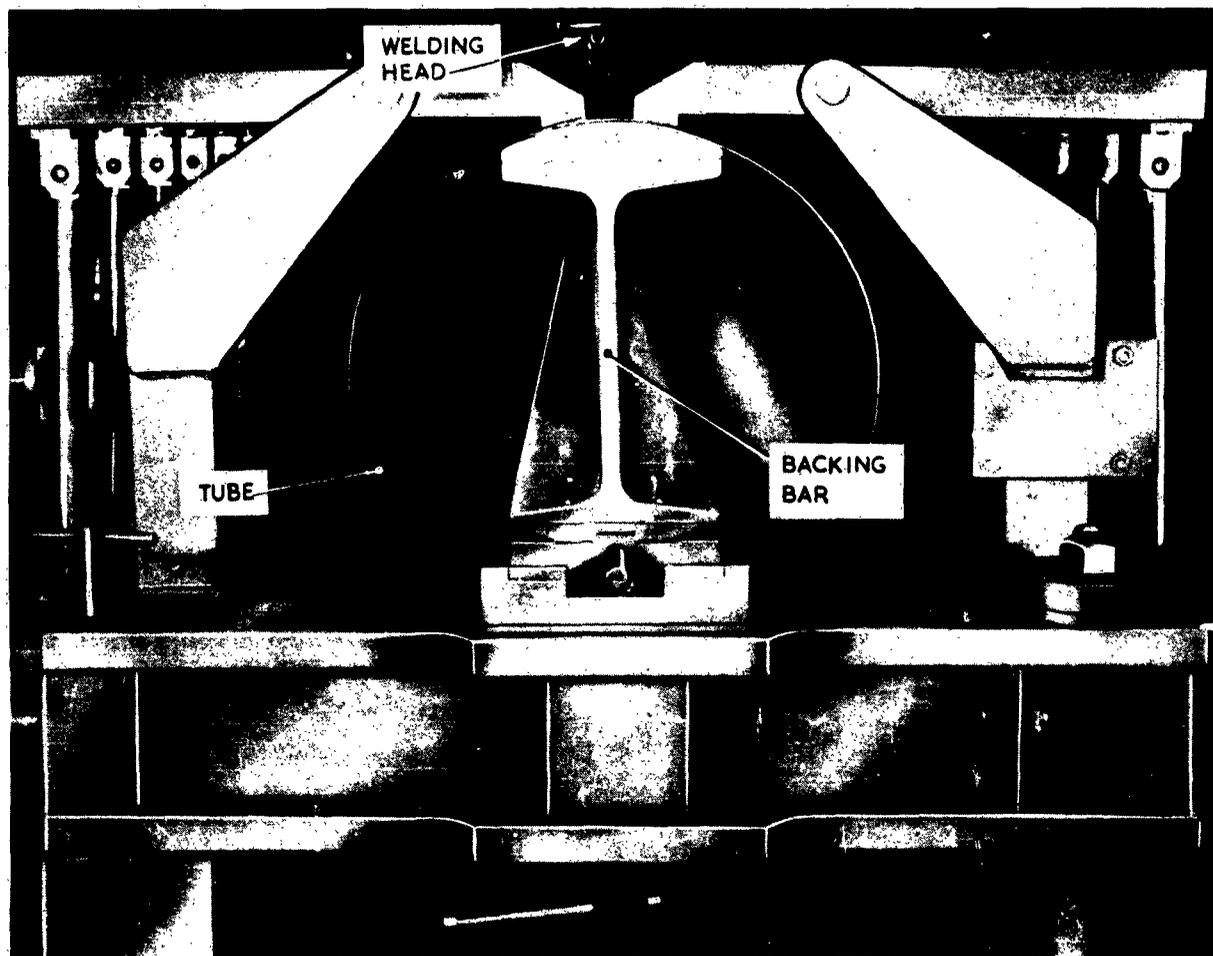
Equipment used for longitudinal welding of light weight tubes
